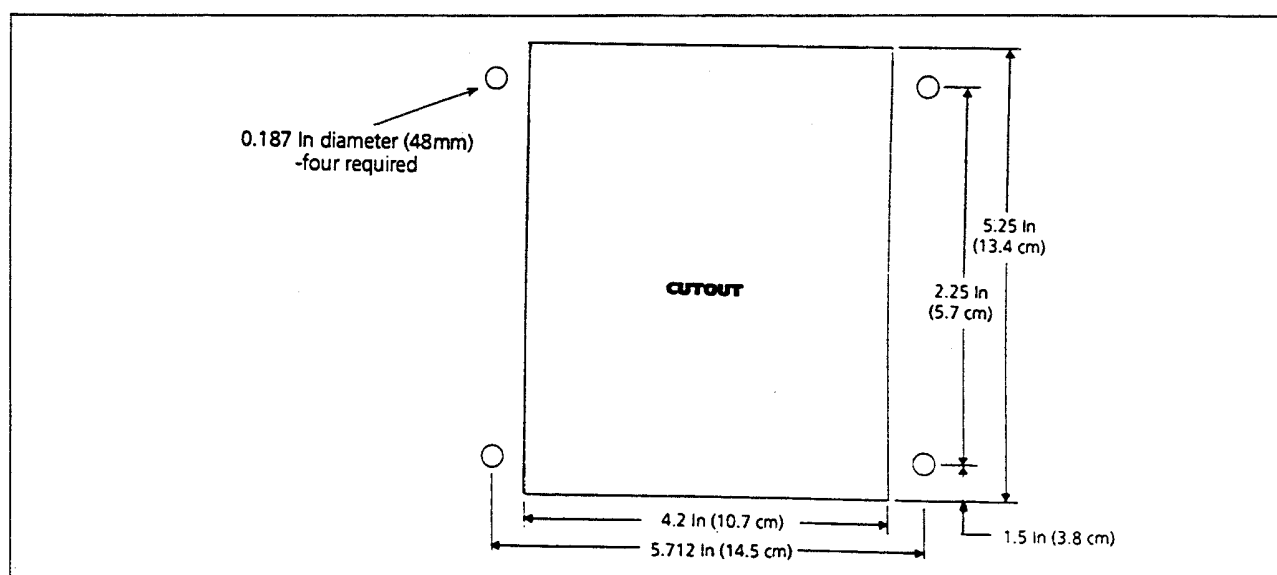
Mounting dimensions, panel-mount chassis for RFL 9720 Digital Pilot Wire Interface
